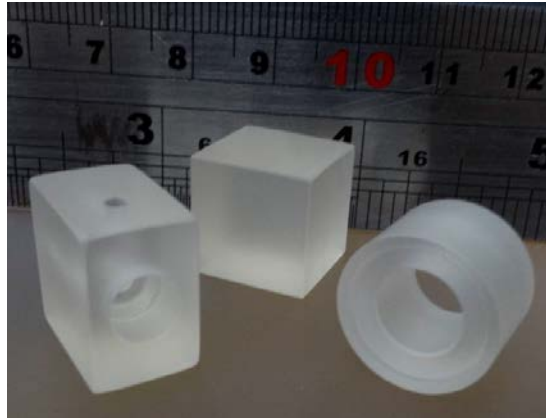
Zerodur components. From left to right: Zerodur coupler, block and wedge holder.
